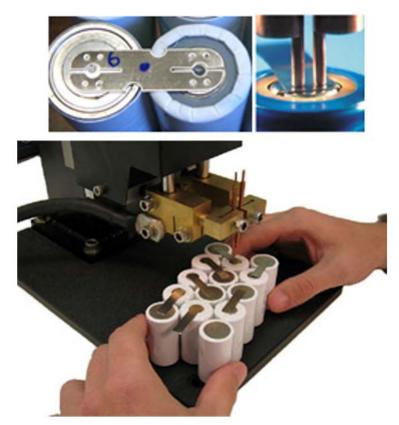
BATTERY CELL RESISTANCE SPOT WELDING BY AMADA MIYACHI, AND (BOTTOM) SUNSTONE ENGINEERING
